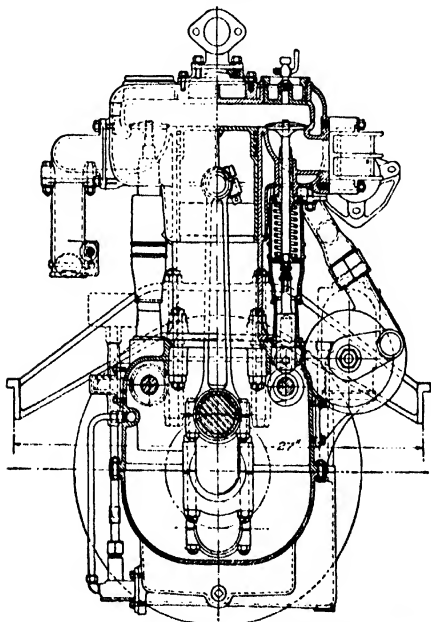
Transverse Section of Typical "T" Head 4-Cylinder Engine
